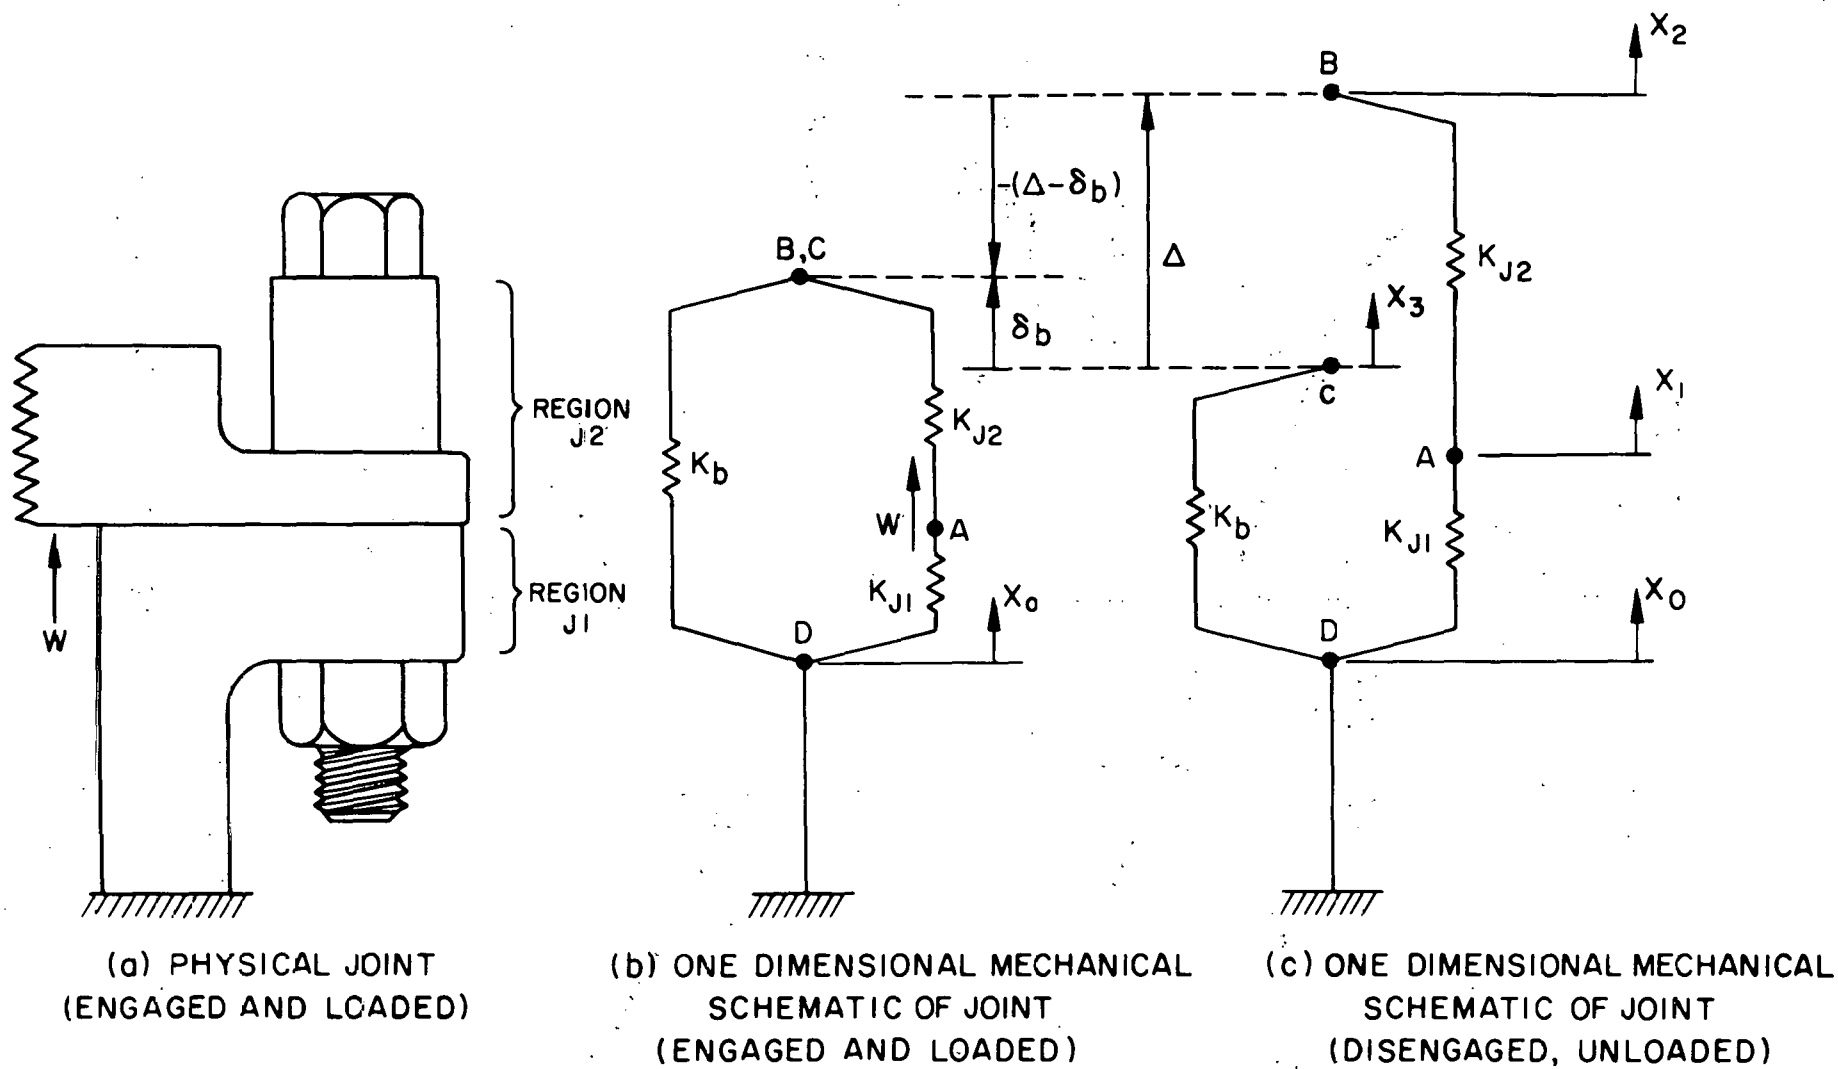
Mechanical Idealization of Bolted Joint to a System of Springs
